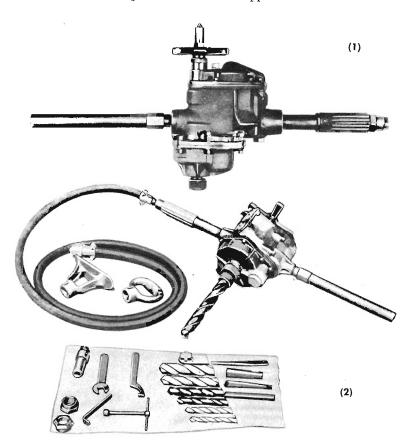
Drilling 15/16-inch holes in steel with the pneumatic wood borer.
